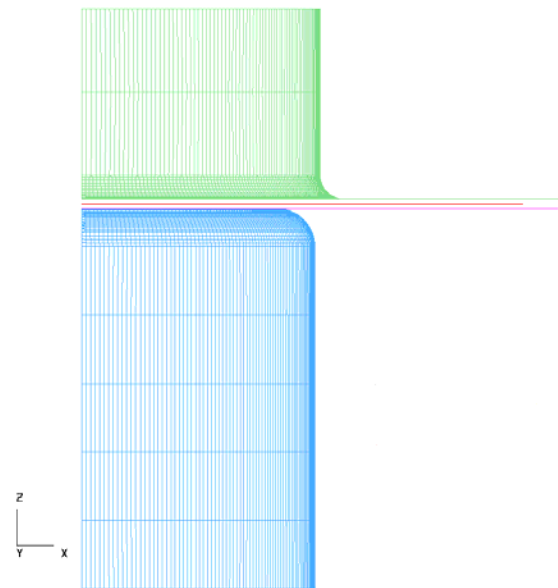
Finite element model of the deep-drawing of cylindrical cups with flange
